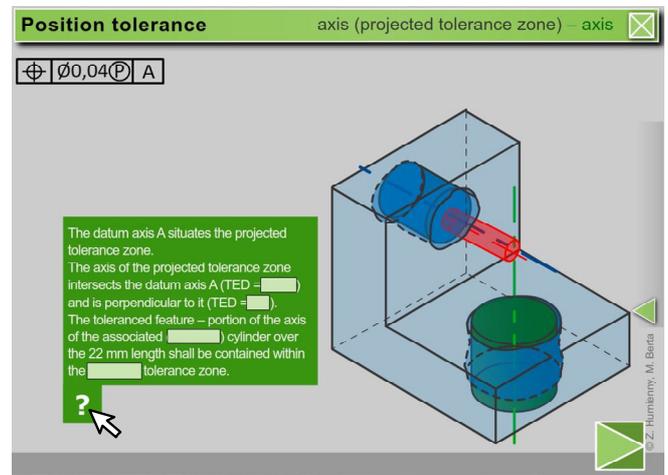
Explanation window* for specification from Fig. 3 – the fifth scene. The cylindrical projected tolerance zone for the projection of the horizontal hole axis is shown. The *Pop-up window* with short recapitulation and brief test is implemented in this last but one explanation window scene.
